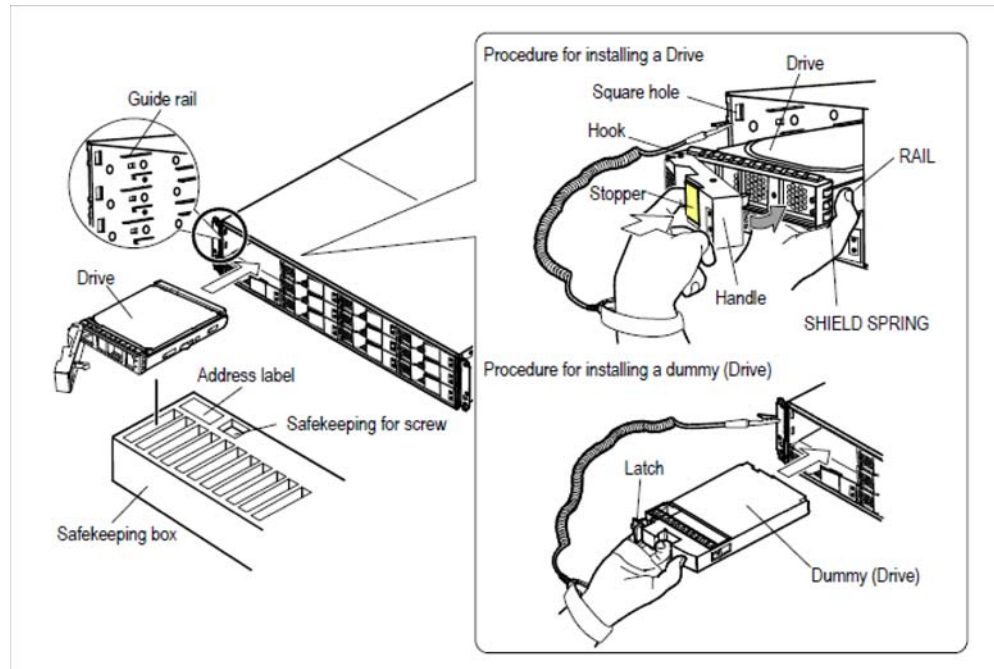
Installing a drive in a CBXSL/CBSL/DBL
